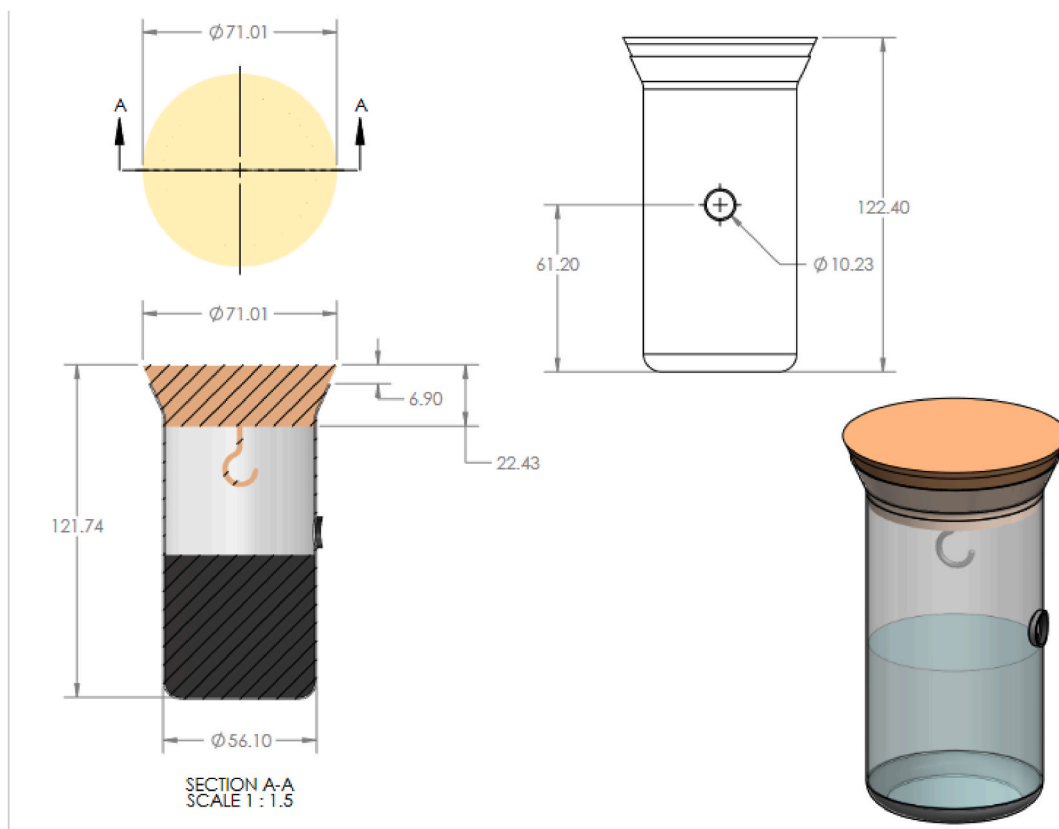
A. The dimension of apparatus adopted in corrosion testing.
